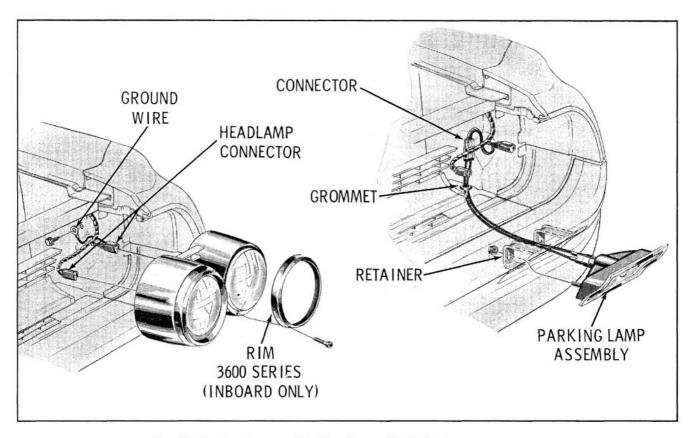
Headlamps and Parking Lamps (33-34-35-36-38 & 39 Series)
